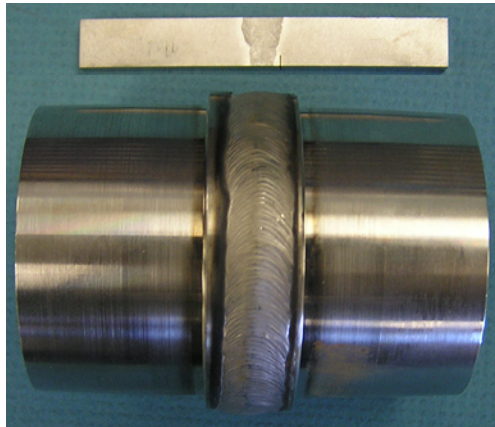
Image of 21-6-9/308L weld ring and rectangular 3-point bend specimen removed from weld ring. Bend specimen was etched to reveal the weld.
